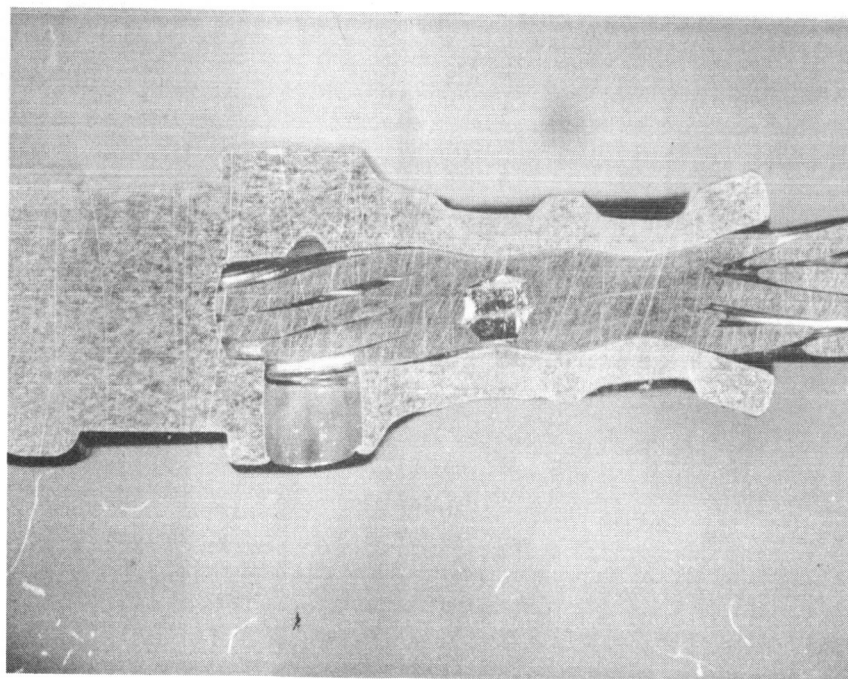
CESO-16-DO50-16 Crimped Contact Sectioned View
